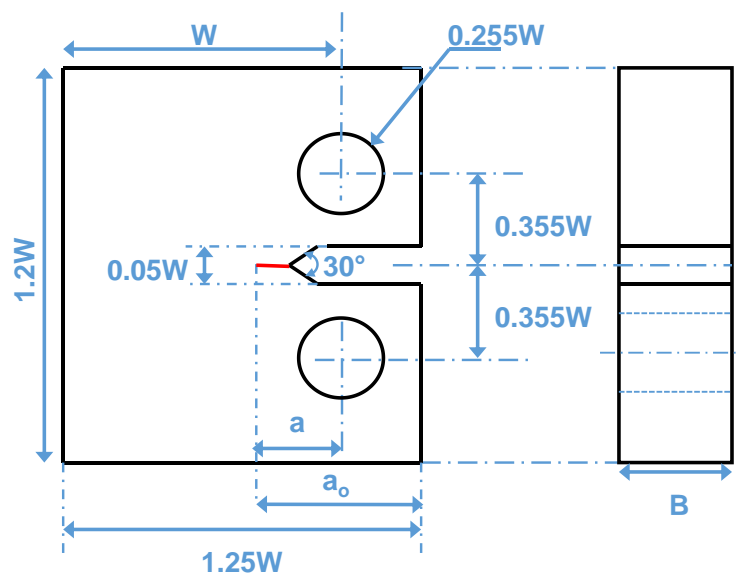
ASTM compact tension dimensions recommended for measuring fracture toughness
